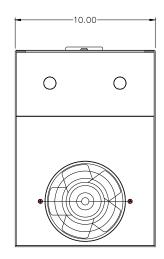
M3345 "V" Chassis Dimensional Outline
